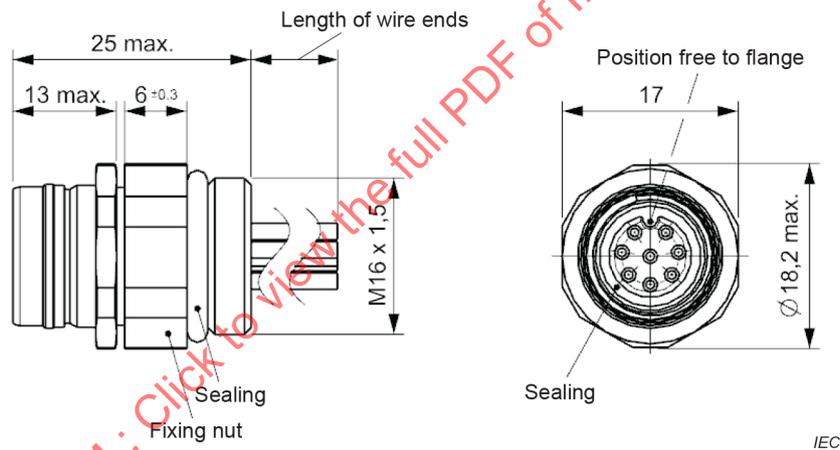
Fixed connector, female contacts, mounting with thread M12 × 1 and outer push-pull locking, with wire ends, single hole front mounting thread M16 × 1,5 and mounting orientation
